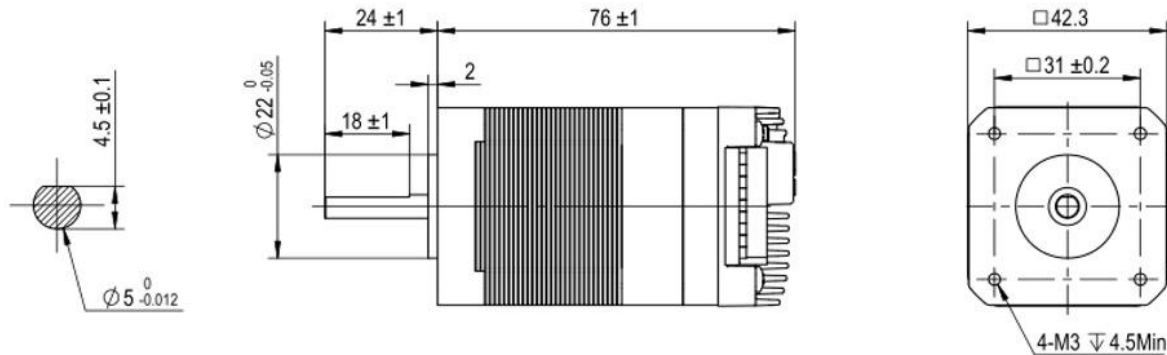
HO motor (NEMA 17) mounting dimensions.
